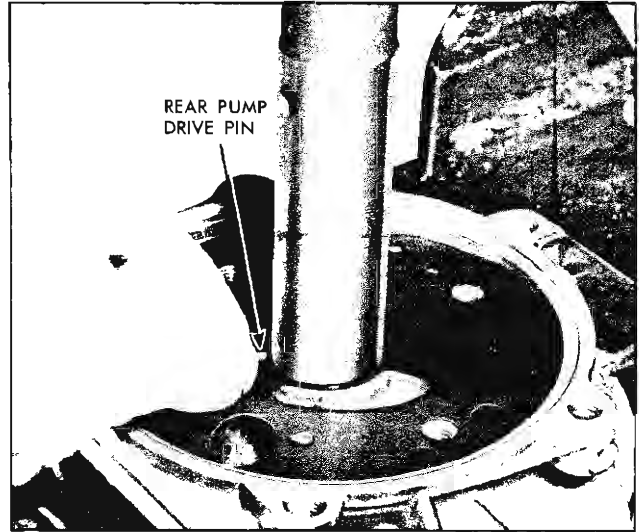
PG—Removing Rear Oil Pump Drive Pin
